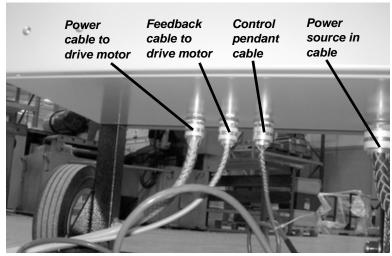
The cable connections are on the bottom of the cabinet. Only the pendant cable is removable.
